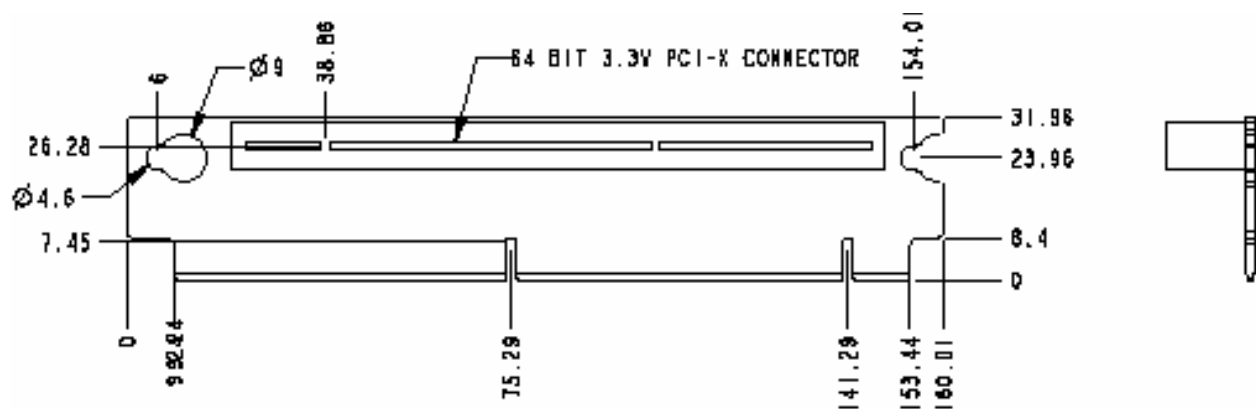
1U Full Height PCI-X Riser Card Mechanical Drawing
